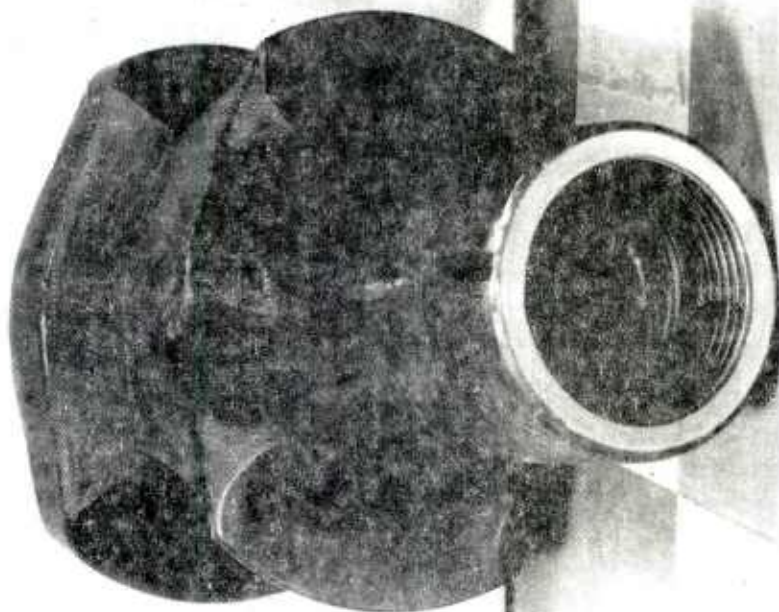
Close up of welds - typical muzzle brake assembly
